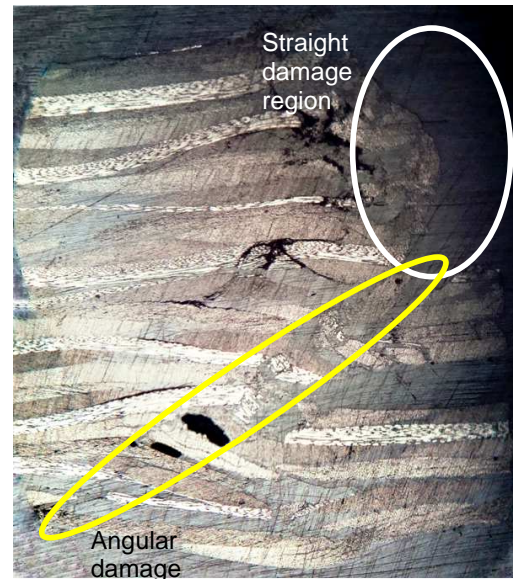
Damaged lower laminate at 0° section for joints with 4.206 Nm bolt torque
